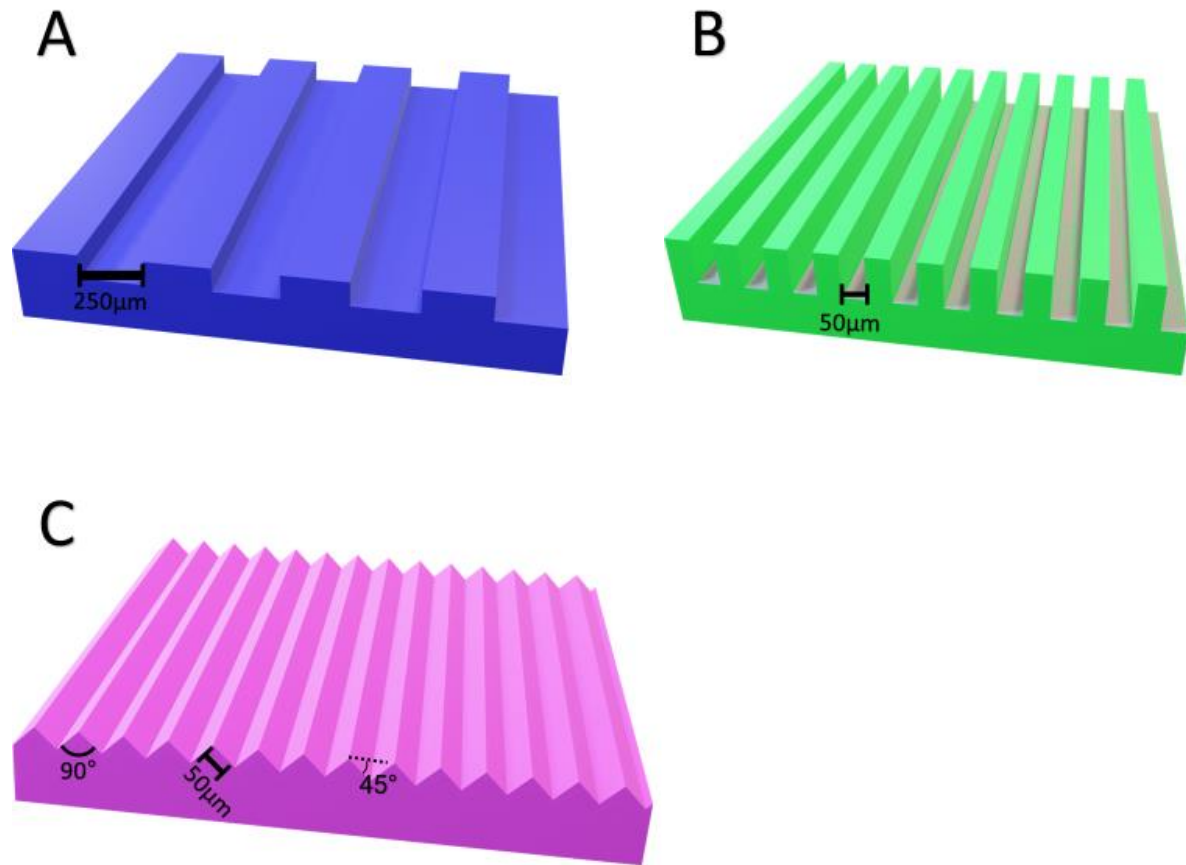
3D drawings used to produce stamps for imprinting of A 250µm, B 50µm and C angled grooves
